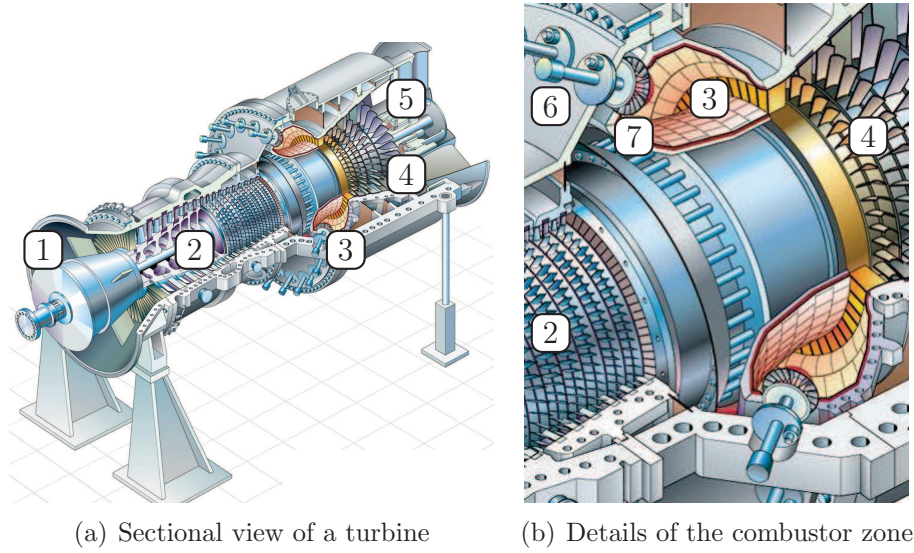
Siemens SGT5-4000F gas turbine 1 - Inlet, 2 - Compressor, 3 - Combustion chamber, 4 - Turbine, 5 - Exhaust, 6 - Fuel inlet, 7 - Swirler (image source: www.siemens.com)
